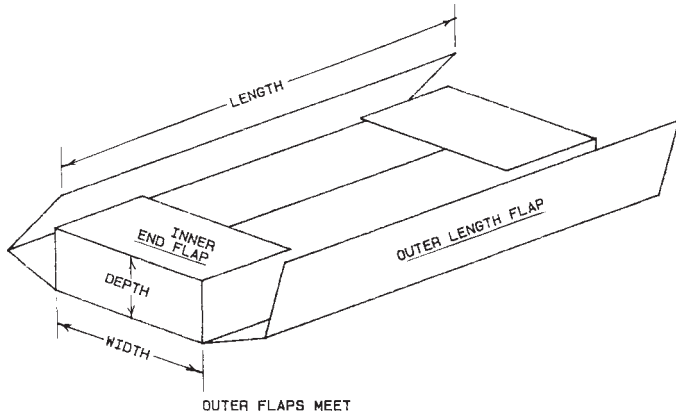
Folder, Fiberboard; OPF—One Piece Folder
